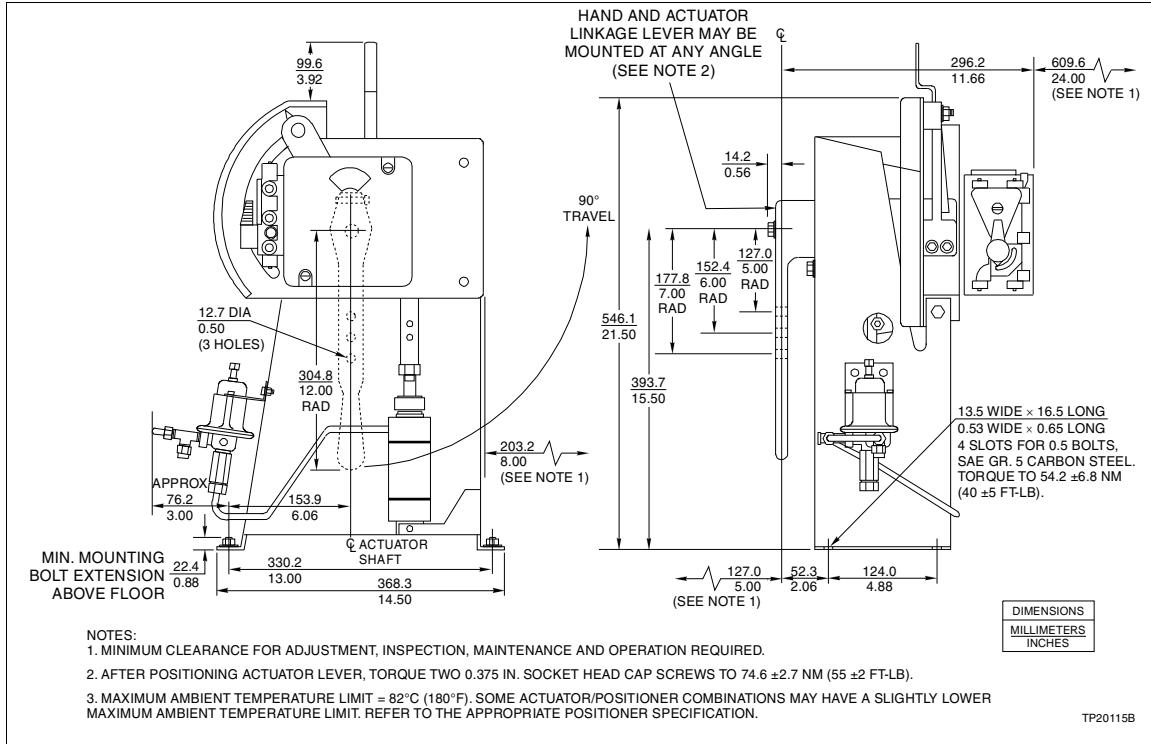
Type UP1 Actuator with Positioner and Air Failure Lock
